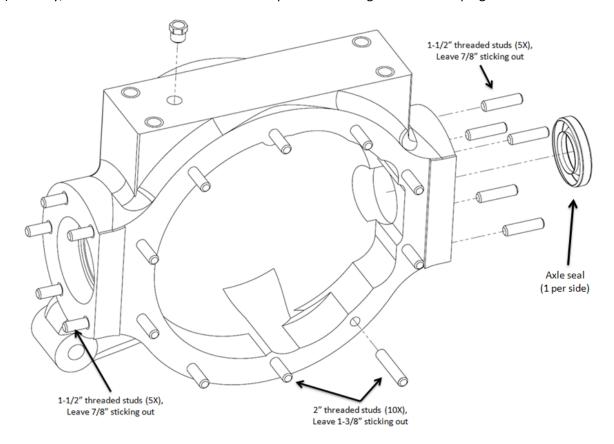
Install the vent, seals, threaded studs and drain plug (not shown) into the rear end housing
